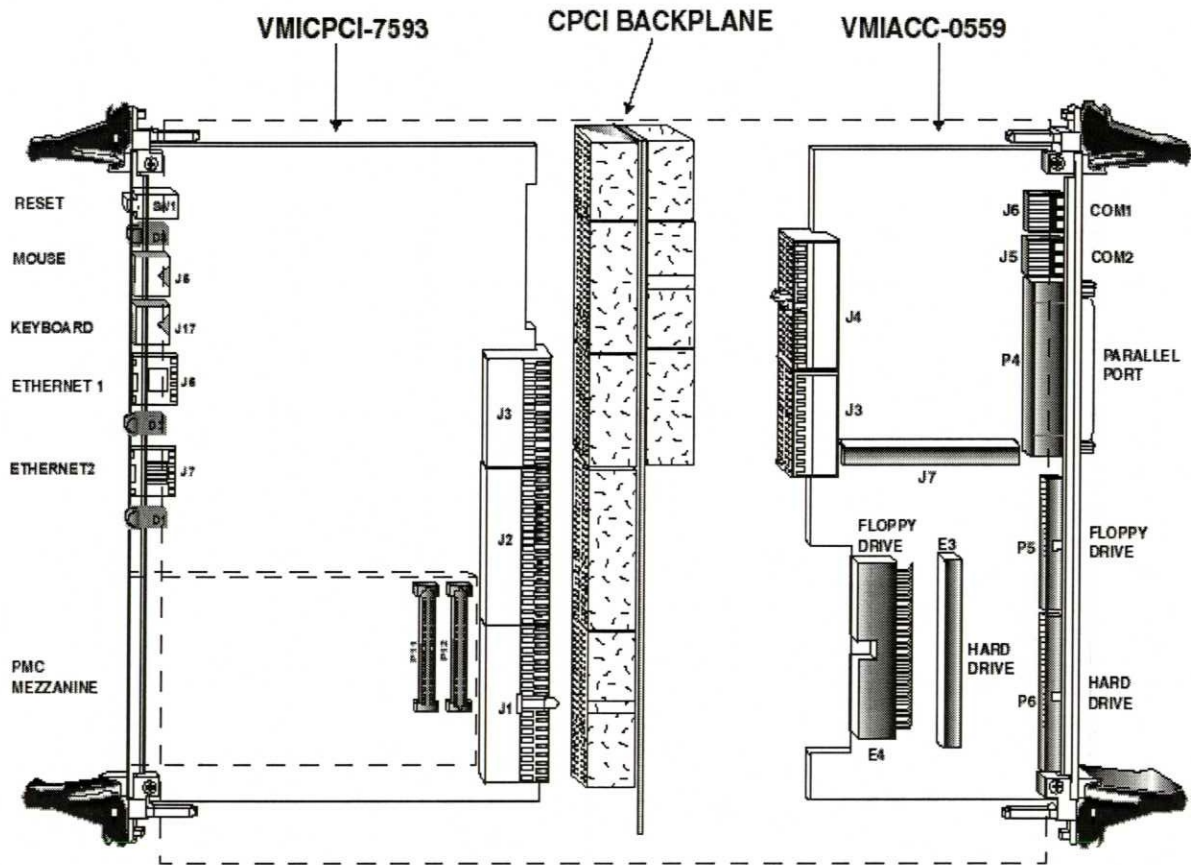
Installation of the VMIACC-0559 Adapter Board with a Typical CPU Board
